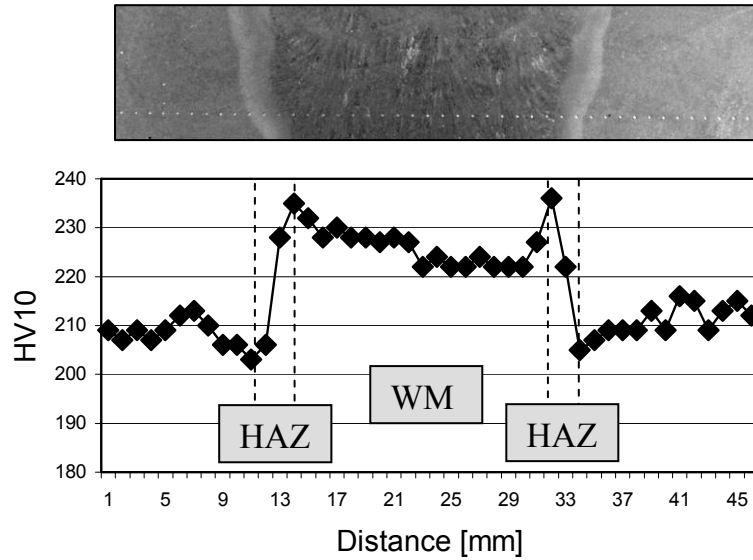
Macrograph and cross-weld hardness profile of the plate weld after post-weld heat treatment.
